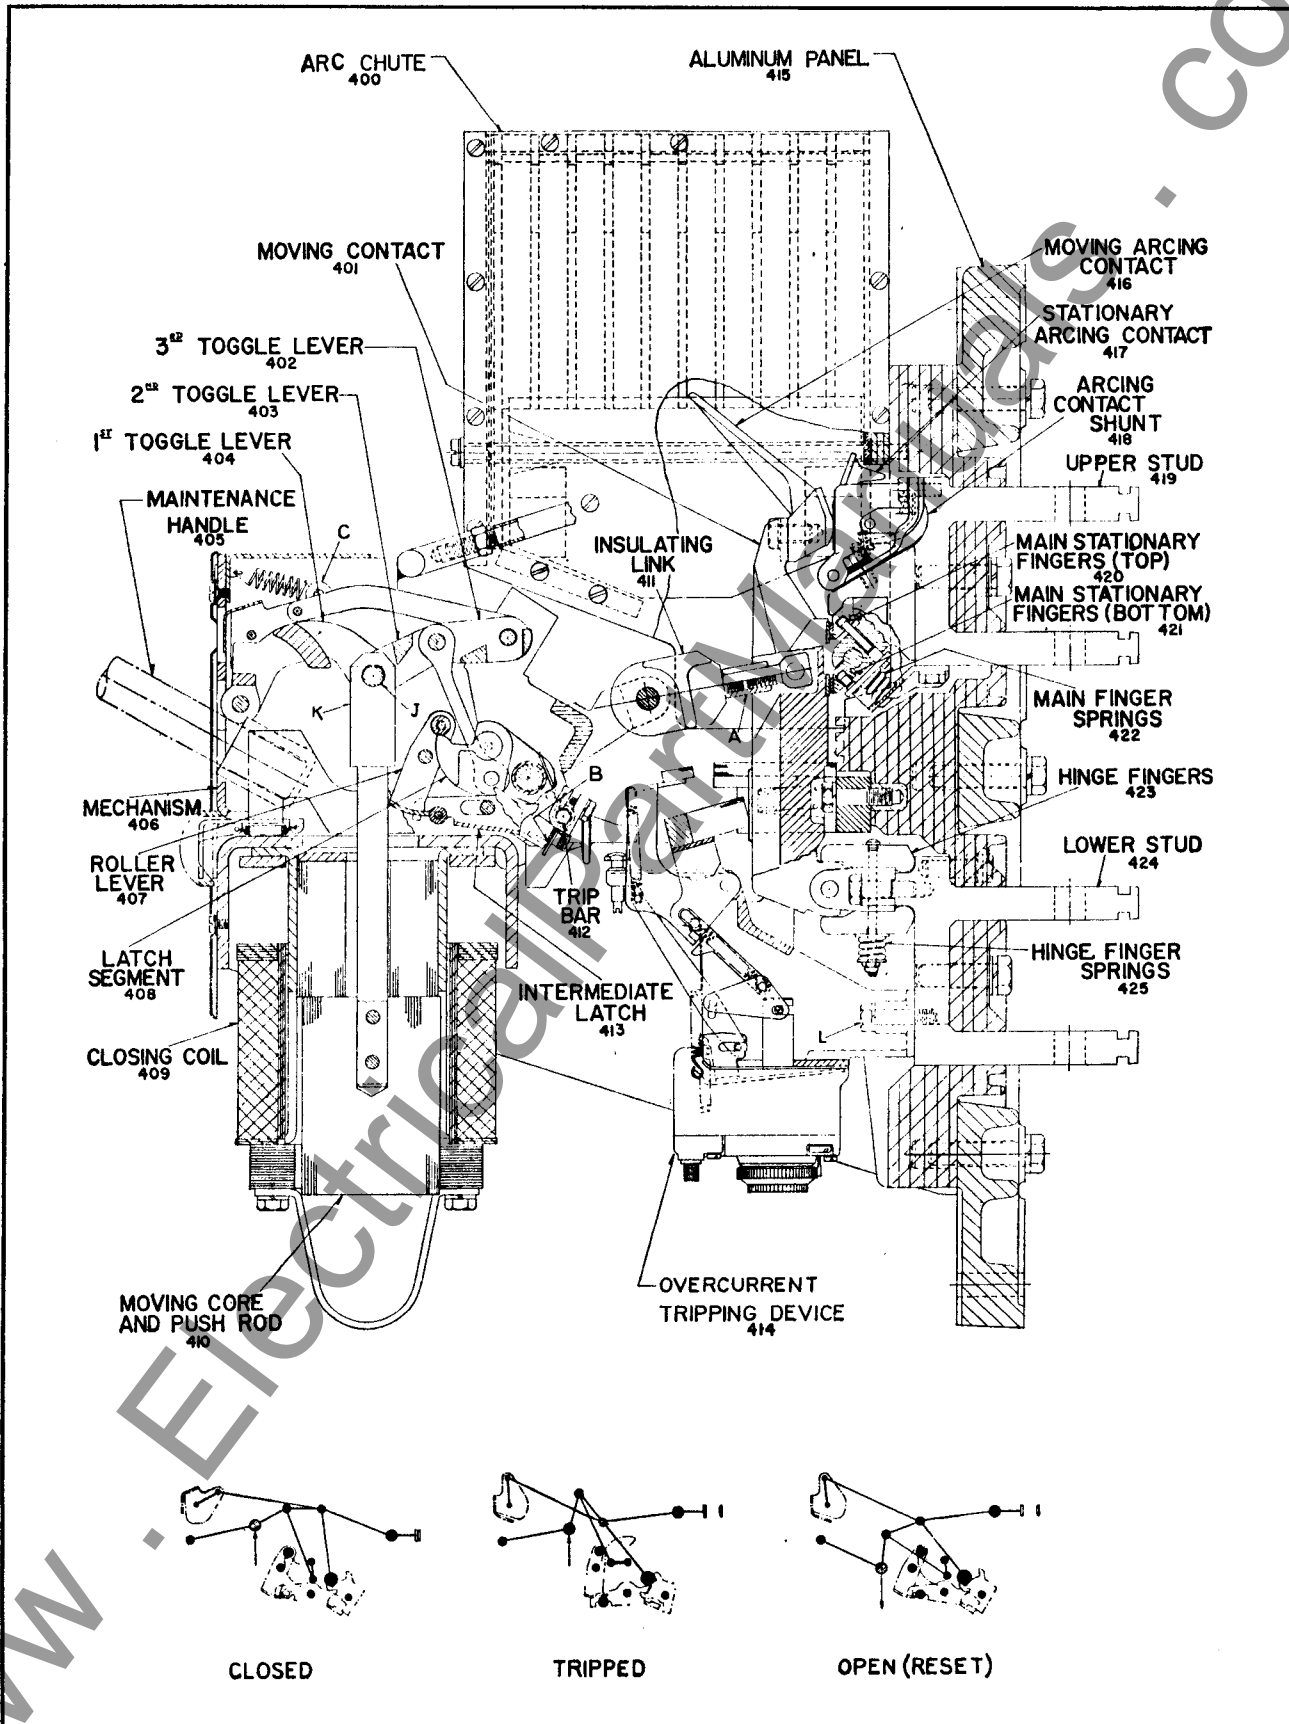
Cross-Sectional View of Air Circuit Breaker
